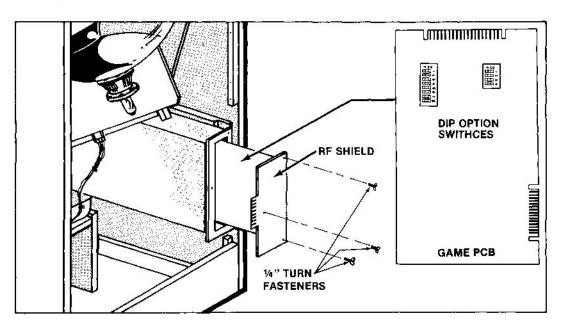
Option DIP Switches and Game PCB Location and Removal
